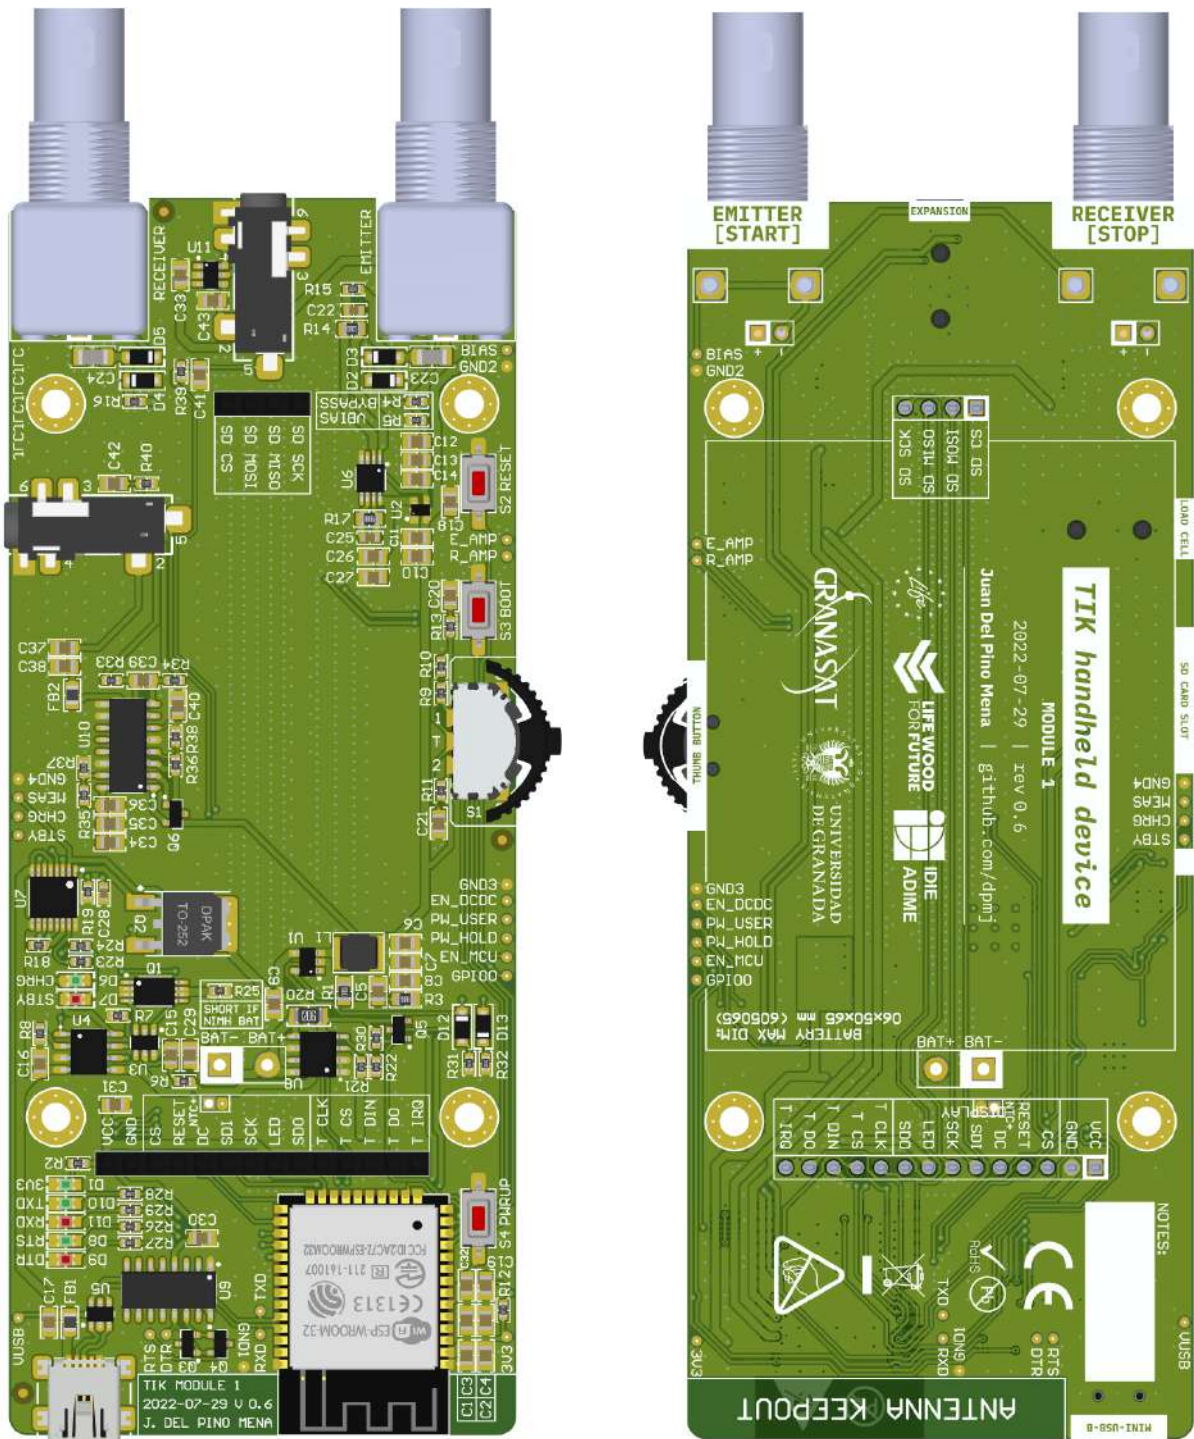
Top and bottom layer prints showing the final copper routing.
